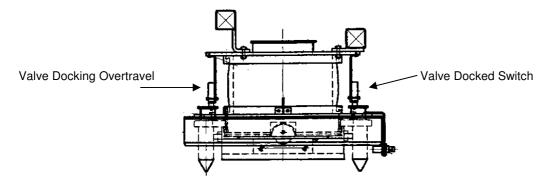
Mill Assembly (G1951-M01) - Buck Valve
